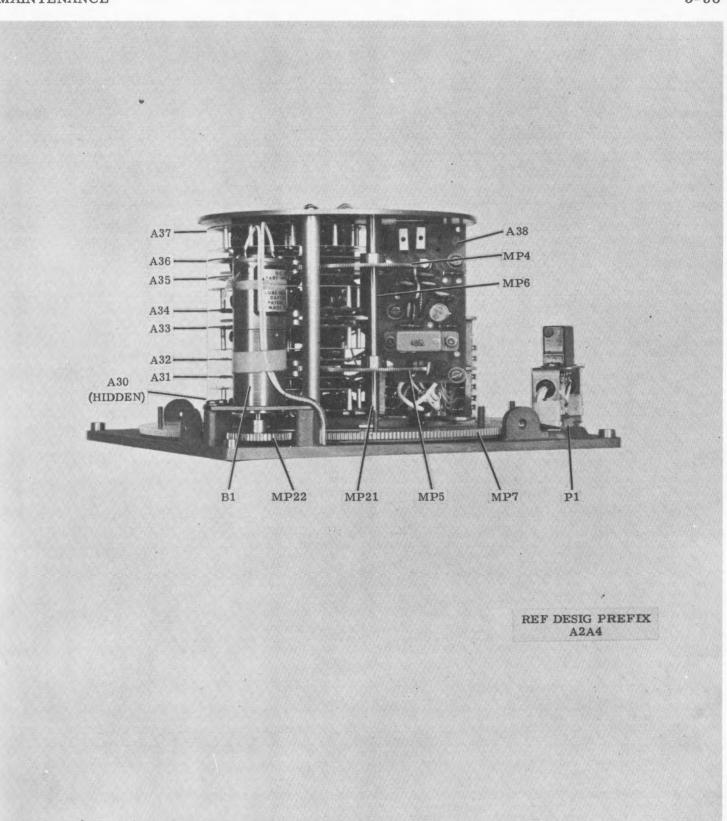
RF Amplifier Electronic Assembly, Turret Removed, Rear and Right Side, Component Location
